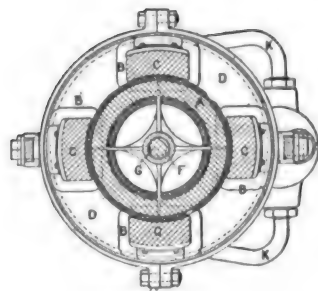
THE SINGRE ELECTRIC RIVETER.
